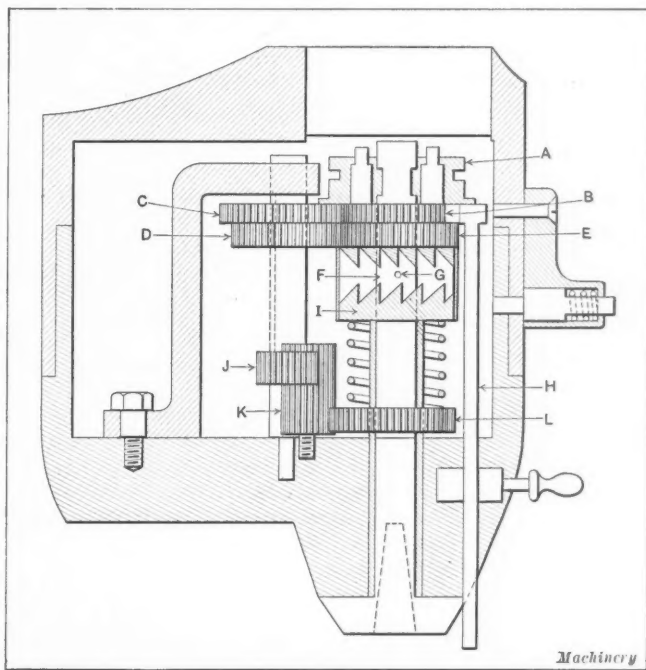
Arrangement of Forward and Reverse Gearing on Tapping Spindle
